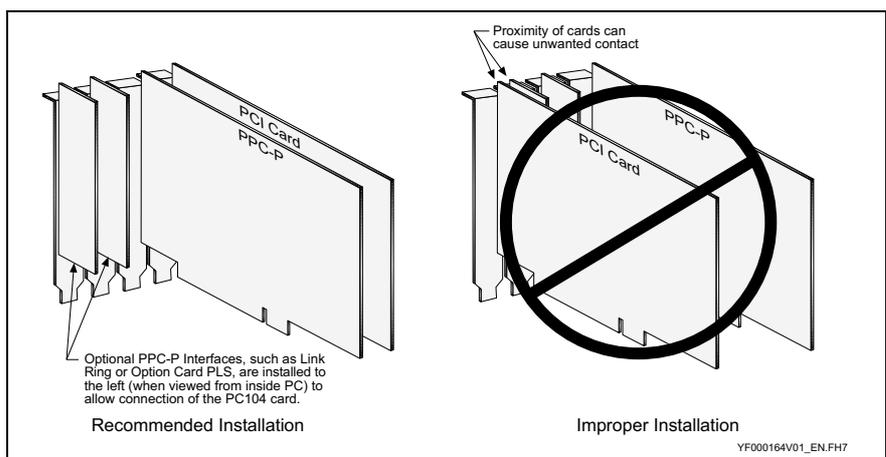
Installation of the PPC-P with several PCI cards in the PC
